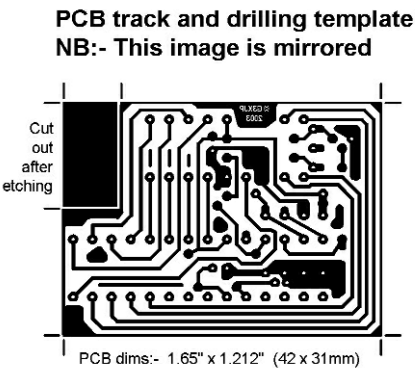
PicAdapter board PCB track and drilling template. NB: This image is reversed
